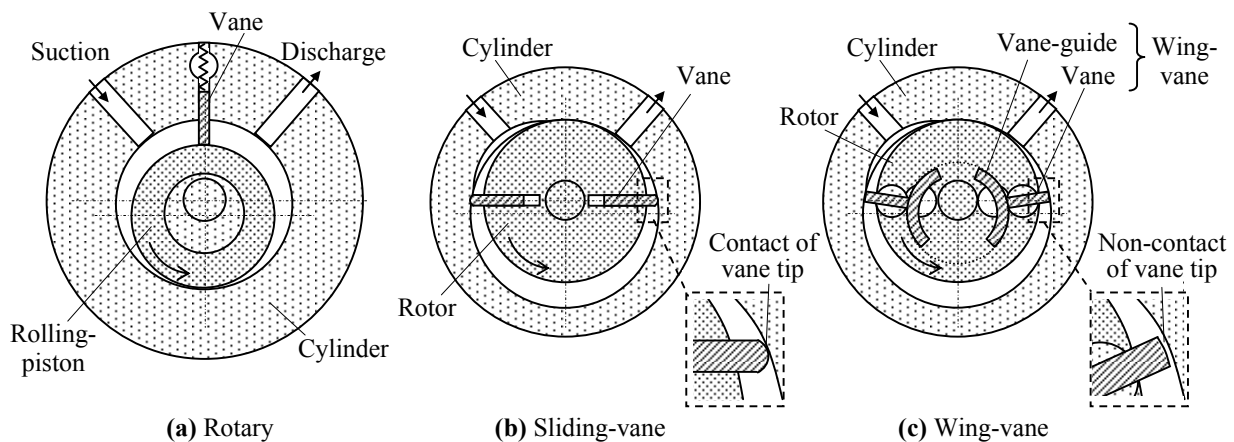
Horizontal cross-sectional view of compression mechanisms
